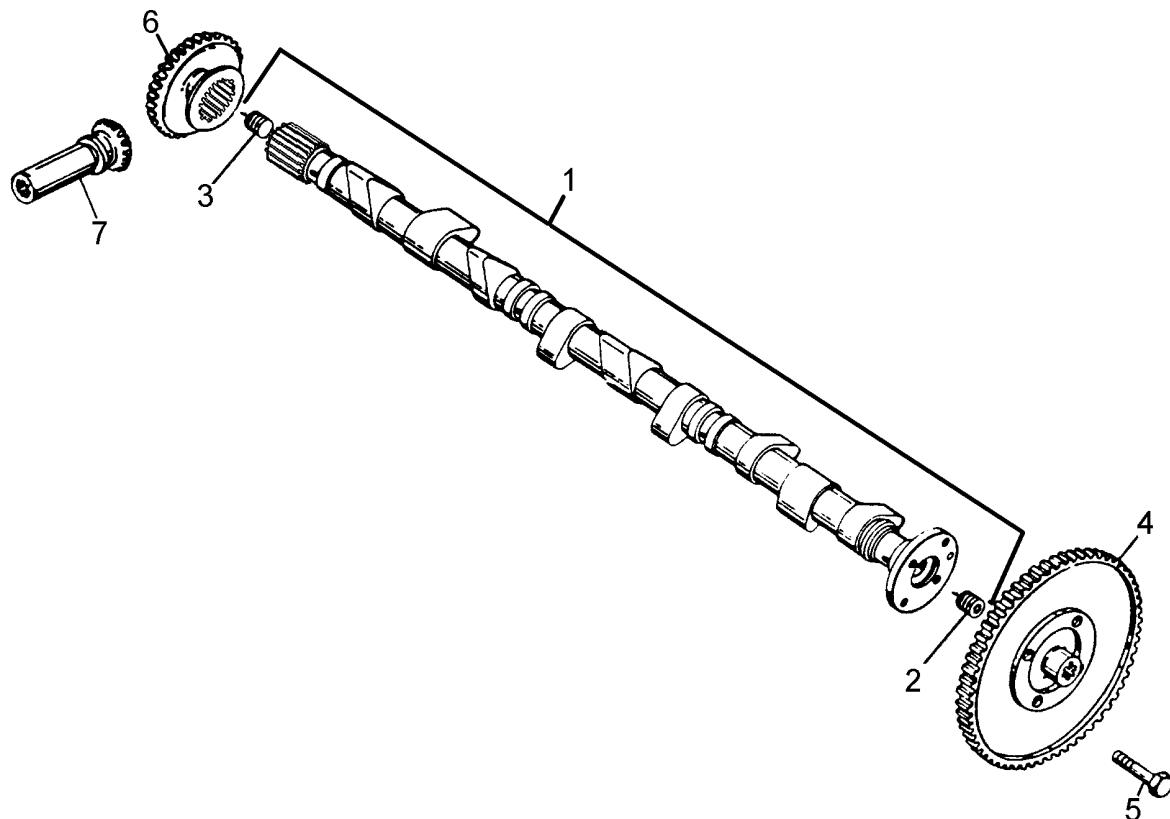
A. CAMSHAFT ASSEMBLY (OLD STYLE)
